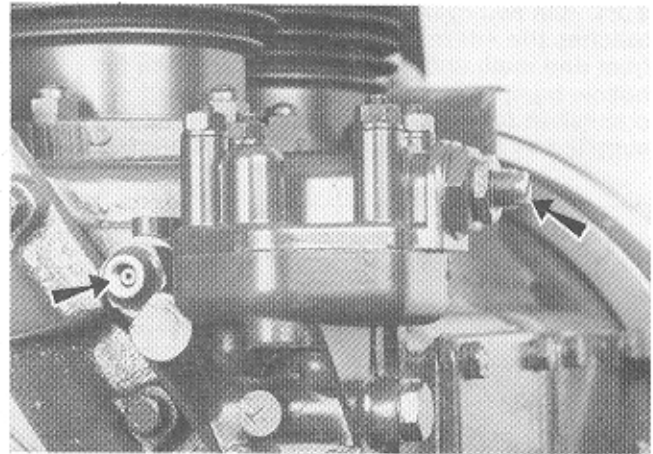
Oil Restrictor Location showing Restrictor (arrowed left) and Relief Valve (arrowed right).
